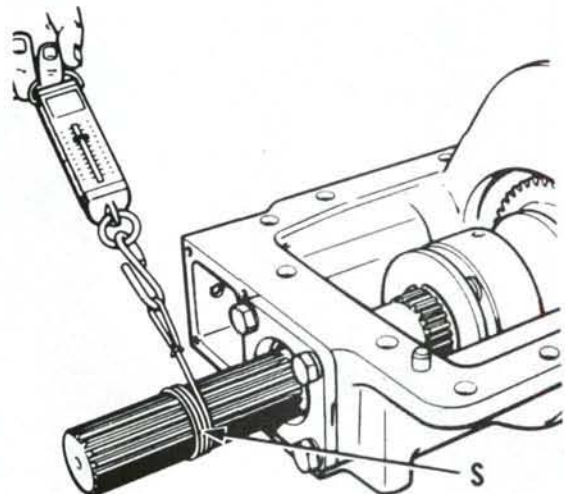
Check rolling torque of transfer gearbox output shaft with string (S) and scale as shown.
